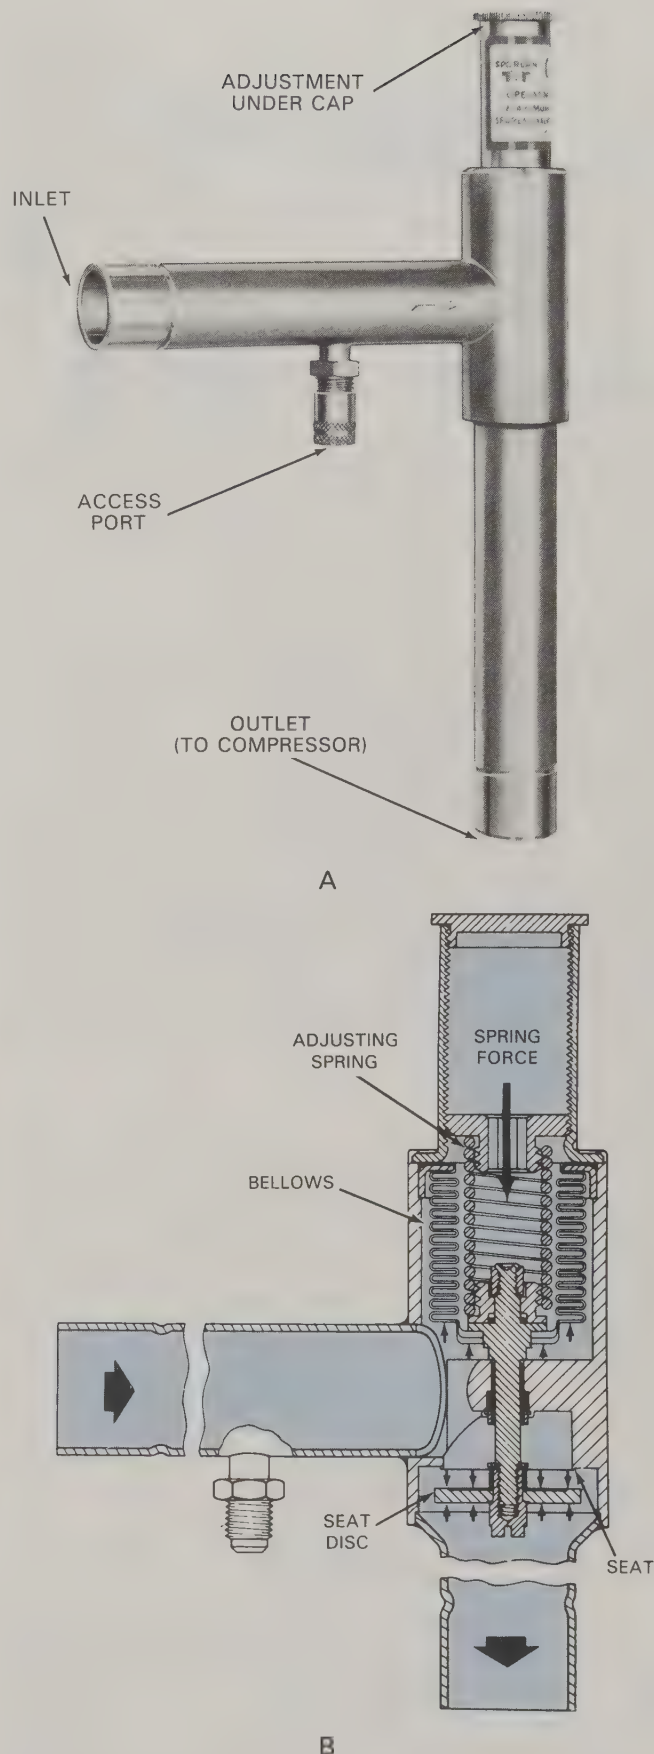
CPR valve. A—Valve spring adjustment is under cap. Note direction-of-flow arrow on body. B—Cutaway view shows component locations. (Sporlan Valve Co.)
